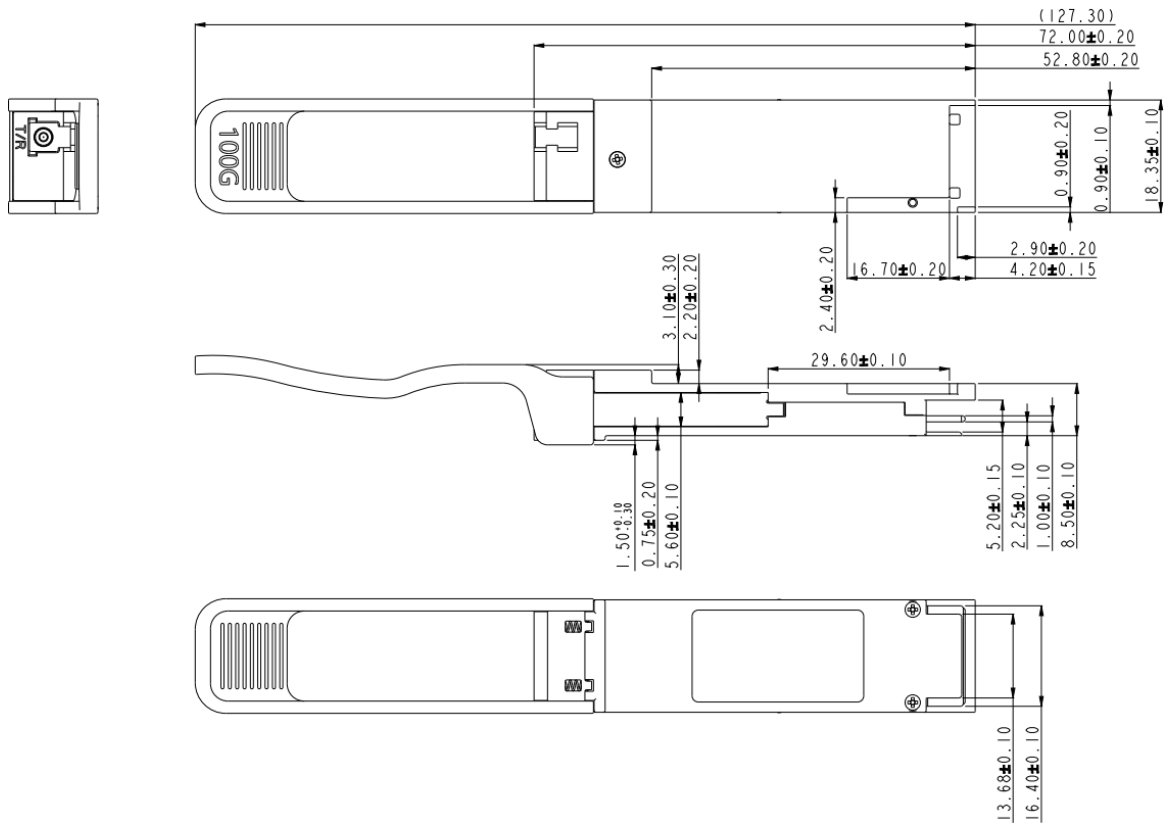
100G LR1 BIDI QSFP28 Mechanical Dimensions
